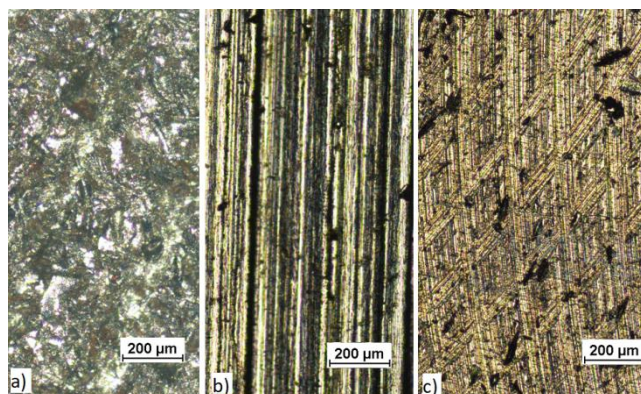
Optical microscopy image of the surface before vibratory machining: a) after blasting, b) after cutting, c) after milling; (magnification x10);
